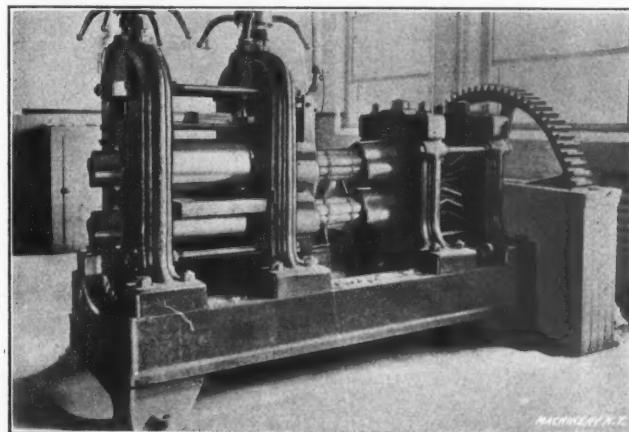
"Breaking-down" Rolls used to reduce the Metal for Wire-making the solder lining of the tube. This ingot is then made into wire by swaging and drawing.
